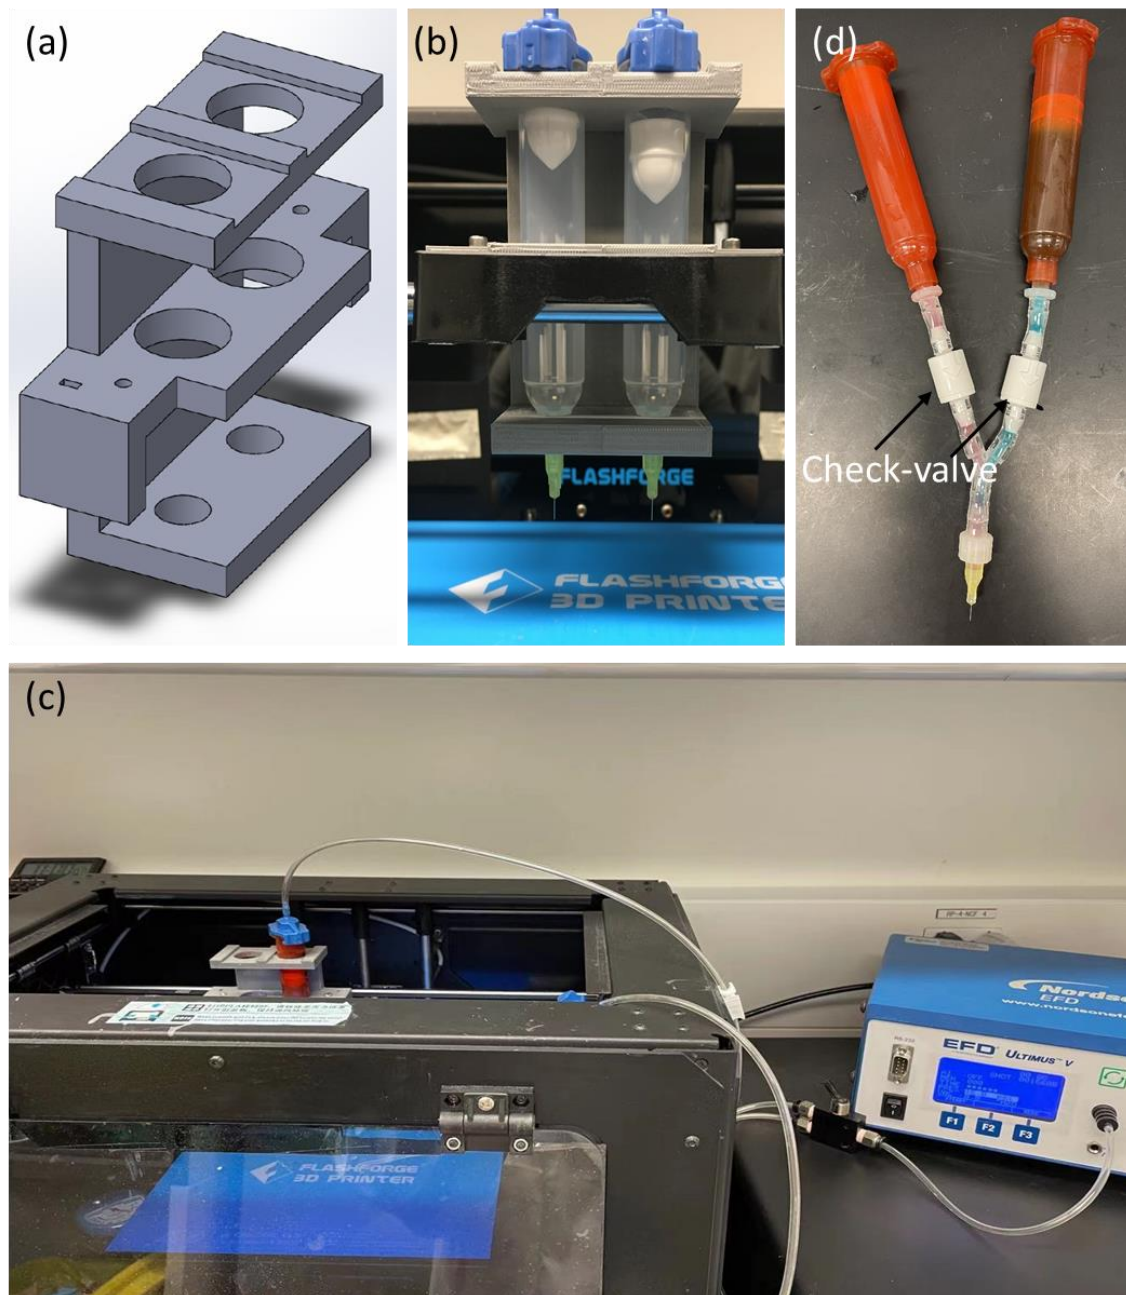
(a) Schematic of the customized dual-syringe holder. (b) Image of the printed dual-syringe holder. (c) The bioink-laden syringe is connected to a pneumatic system. (d) Images of the dual-syringe printing design with a check-valve connecting to both syringes to avoid backflow of the bioinks.
